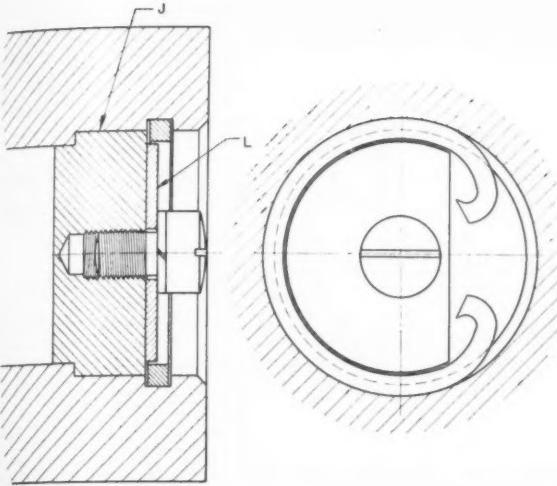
Special washer fastened to shouldered plug by a cap screw provides an alternative to the spring loaded floating plug used in Fig. 5
